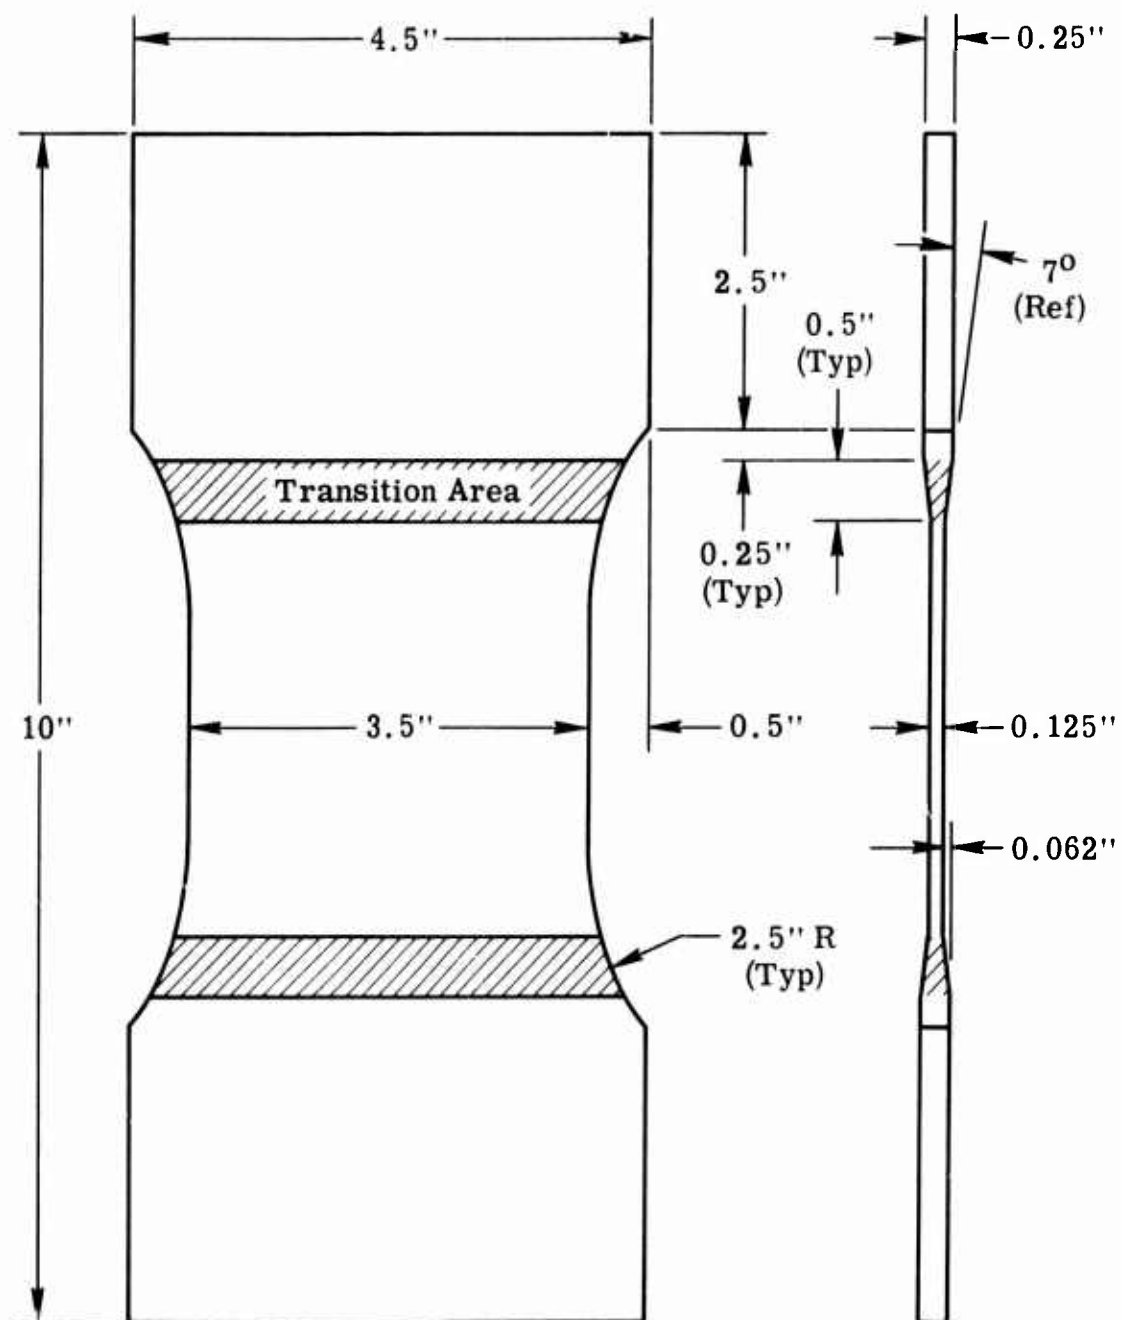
Dimensions of Standard Ballistic/Tensile Test Specimen.
